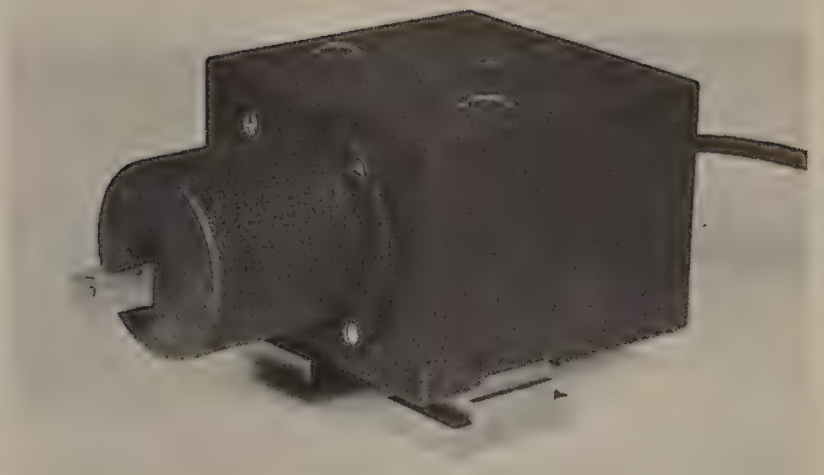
Lathe dynamometer for measuring components of force on tool.
